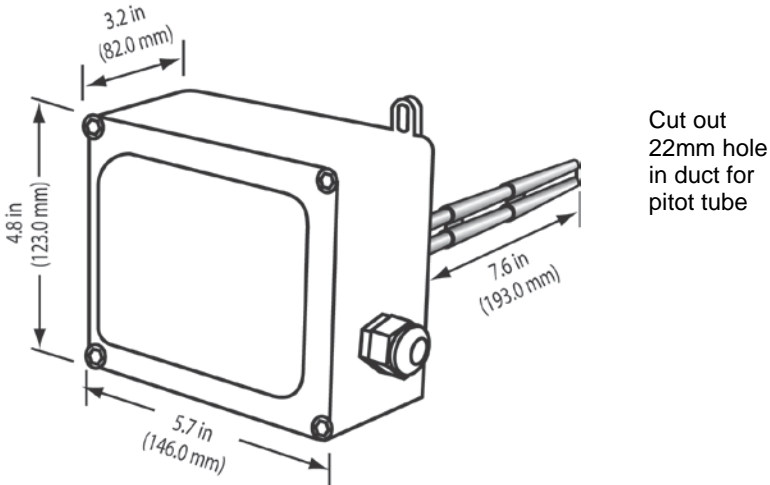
Typical Dimensions of the IAM-100 (Back)
